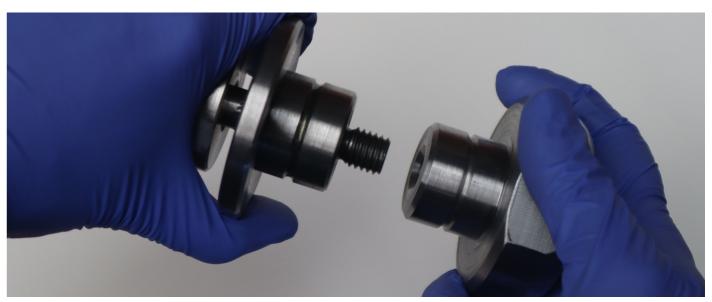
Connecting handle to Driveshaft; Threaded connection
